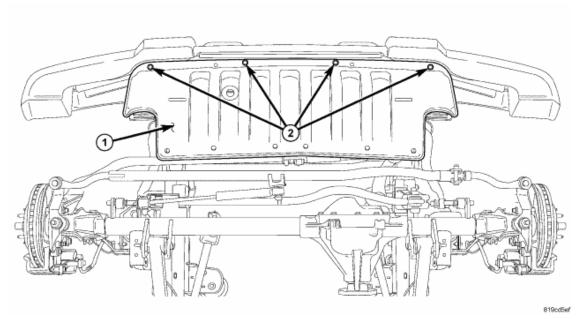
Front Splash Shield Courtesy of CHRYSLER LLC
